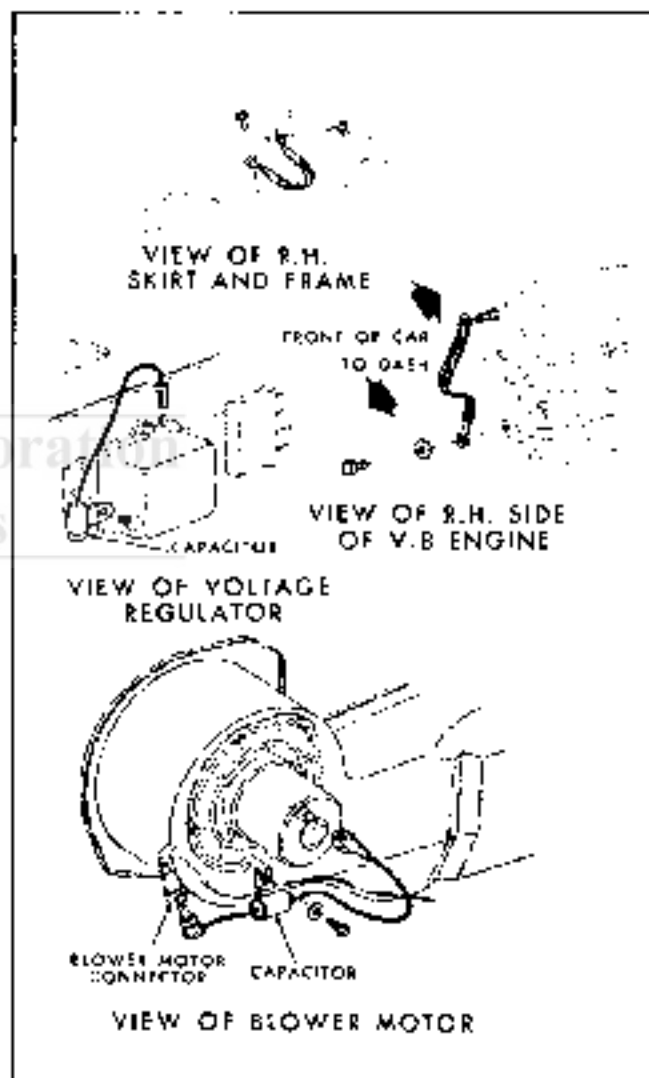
Radio Suppression Equipment—Torqueflite
